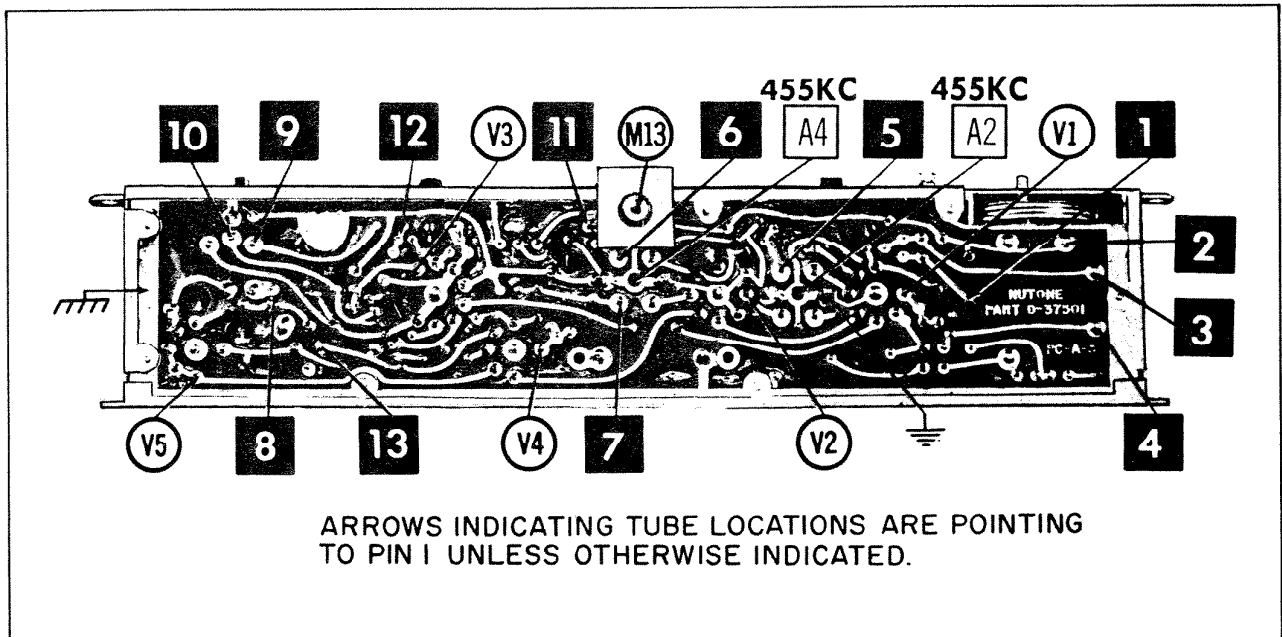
Bottom view of master chassis printed board, with location of printed circuit points as shown on schematic in Fig. 19.
